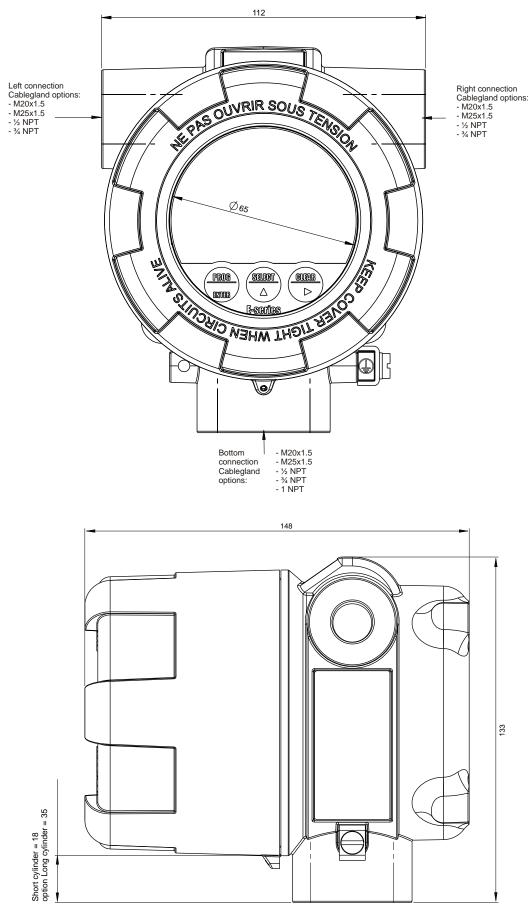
Dimensions (in mm) – Aluminum / Stainless Steel enclosures.
